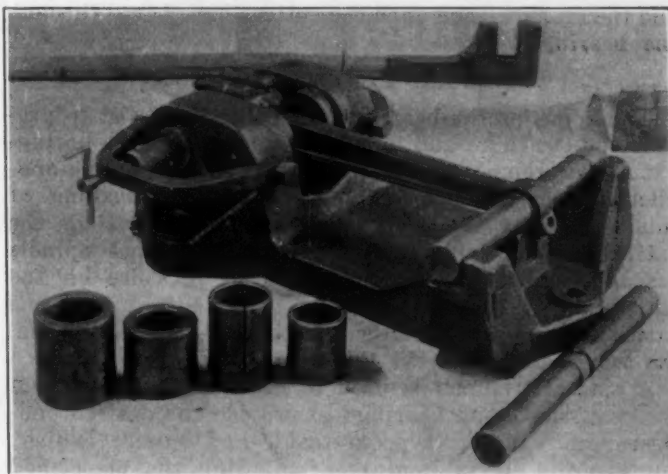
CONNECTING-ROD STRAIGHTENING AND ALIGNING FIXTURE. This Is Made Particularly Sturdy So That the Rod Can Be Straightened while in the Fixture. The Rod Is Assembled in the Fixture on a Mandrel and Tapered Bushing in the Big-End and Adjusted by the Clamp Set-Screws So That the Sides of the Connecting-Rod Clear the Fixture. Another Mandrel Is Inserted through the Wristpin Bearing and Laid in the Lands of the Fixture. Bends and Twists in the Rod Are Indicated by Relative Clearances between the Ends of the Mandrel and the Vertical and Horizontal Lands and Are So Exaggerated by the Length of the Mandrel That Rectification Is Made Easy.
